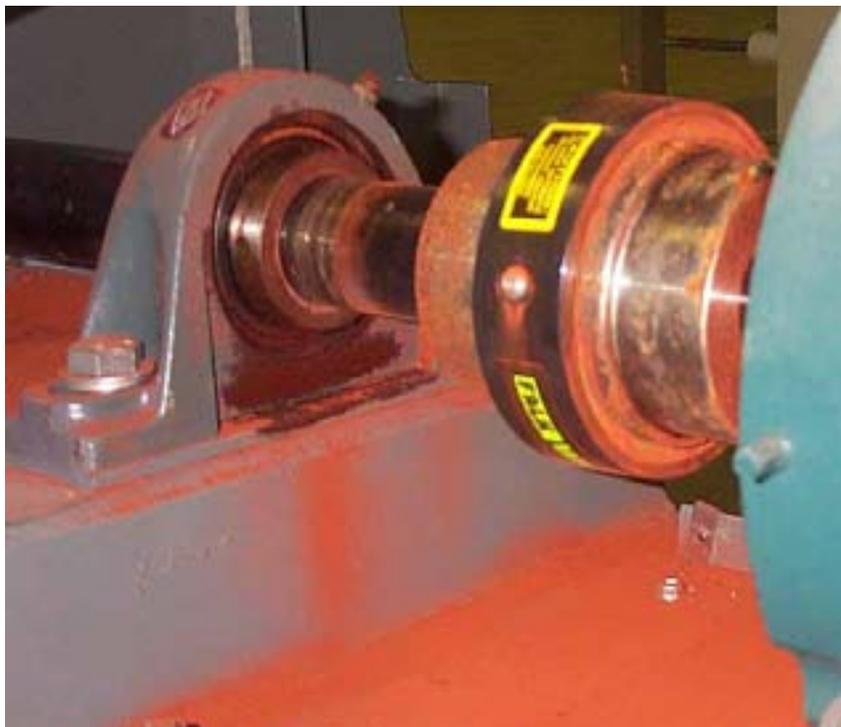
Red Fretting Corrosion Dust when element Operating Under Severe Vibratory Loads
